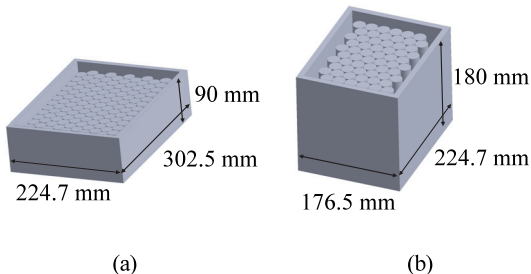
Detailed dimensions of two replaceable battery types: (a) one-layer flat type and (b) two-layer tower type
